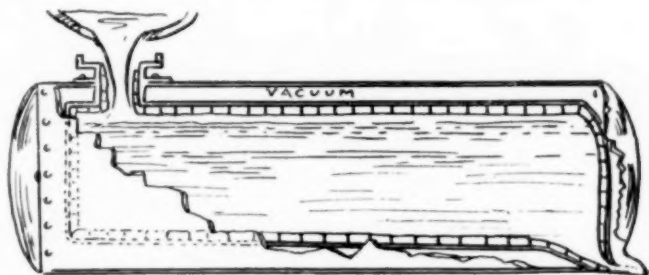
SECTIONAL VIEW OF MIXER USED BY THE FORD MOTOR CO. IN MAKING CASTINGS DIRECT FROM THE ORE
